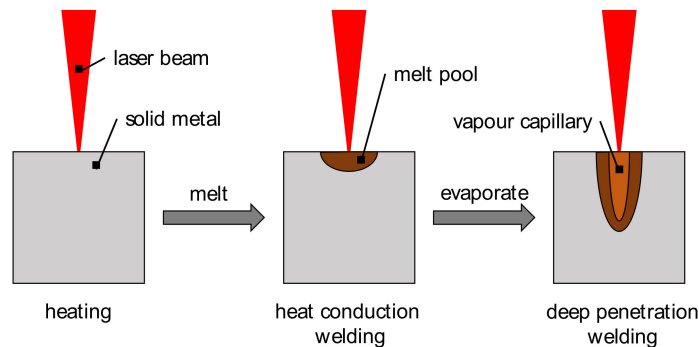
Illustration of process regimes (heat conduction and deep penetration welding) after [20].
